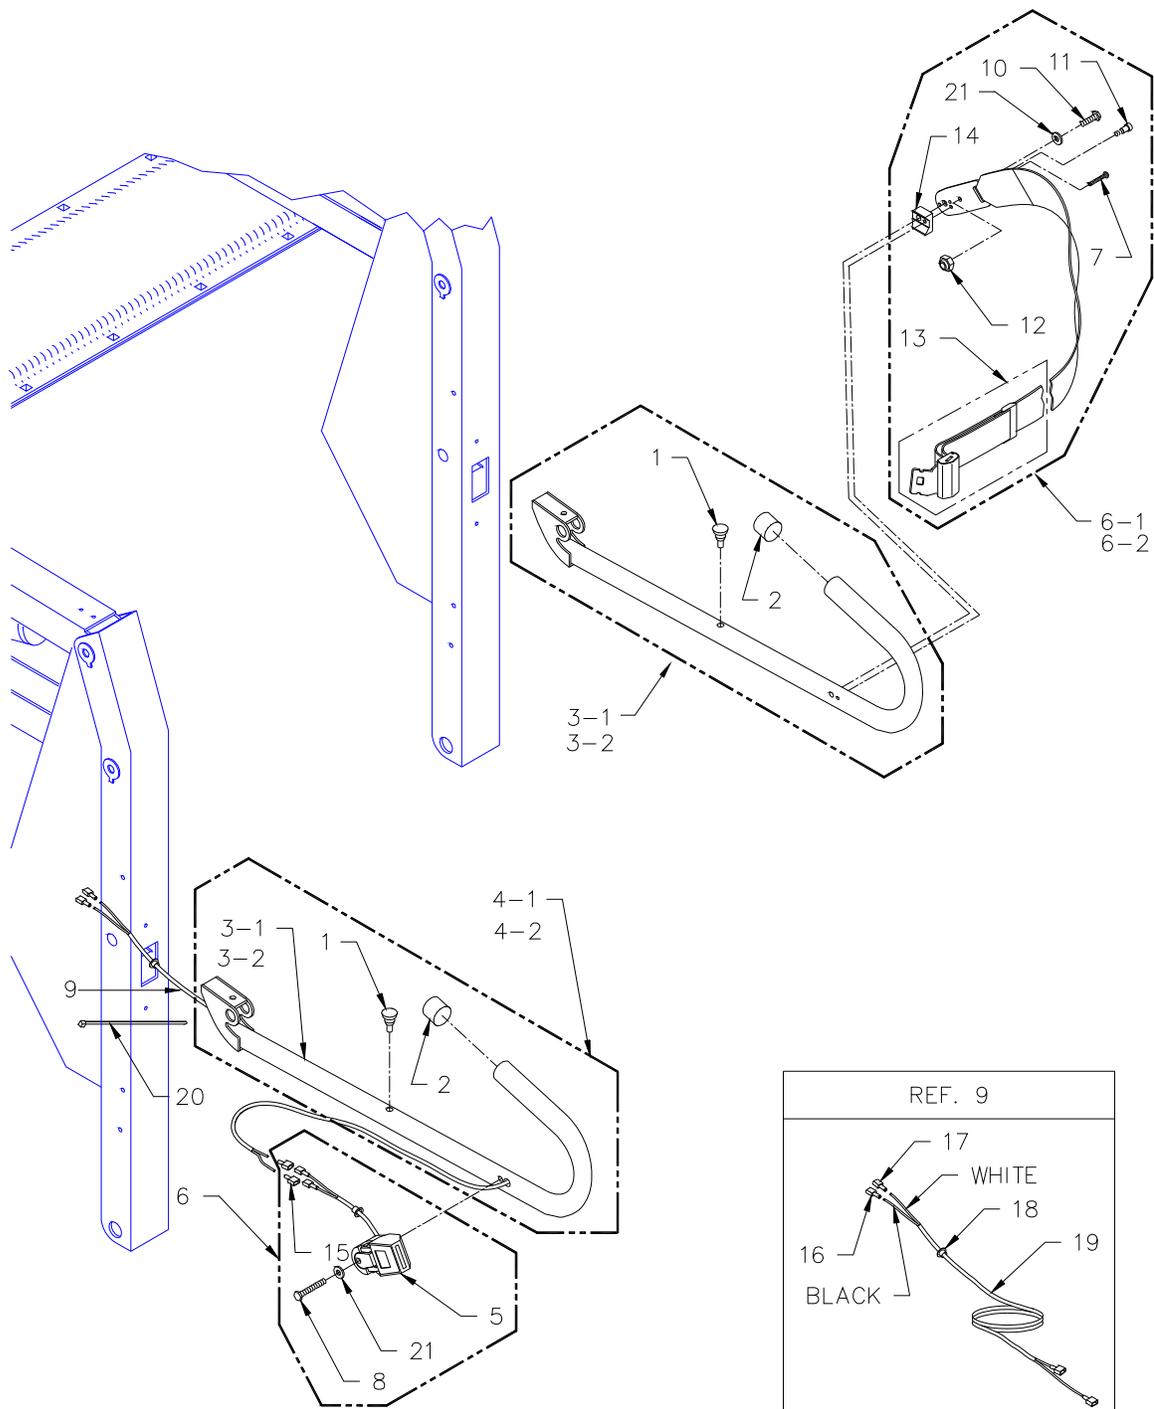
K-2005 (ADA) HANDRAIL ASSEMBLY
